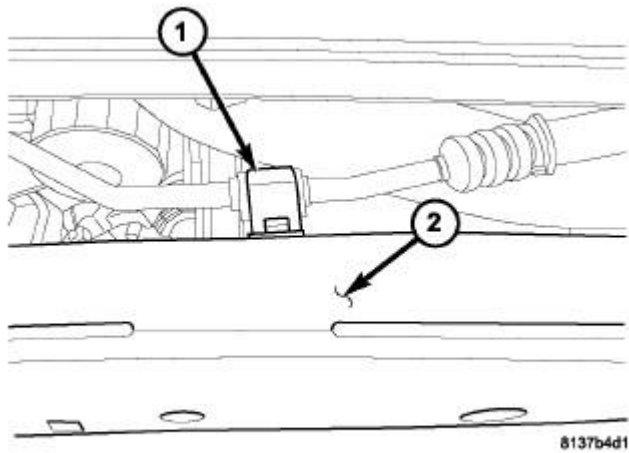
HOSE MOUNTING BRACKET TO CRADLE
